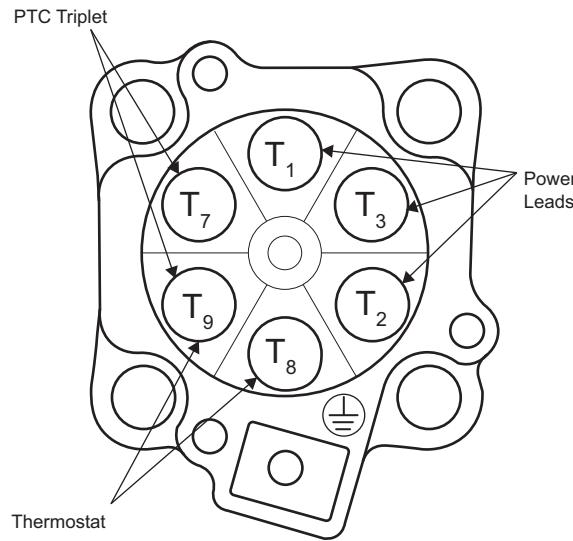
06D, 06CC 17-37 cfm 6-Pin Universal Terminal Plate Arrangement
